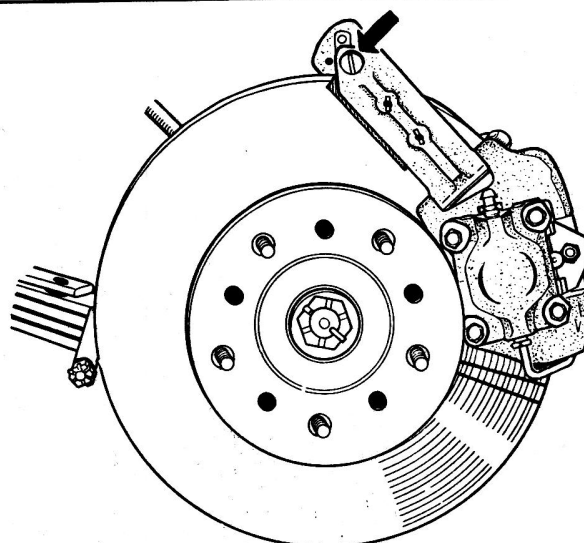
Handbrake caliper (early type). Position of adjuster bolt arrowed
